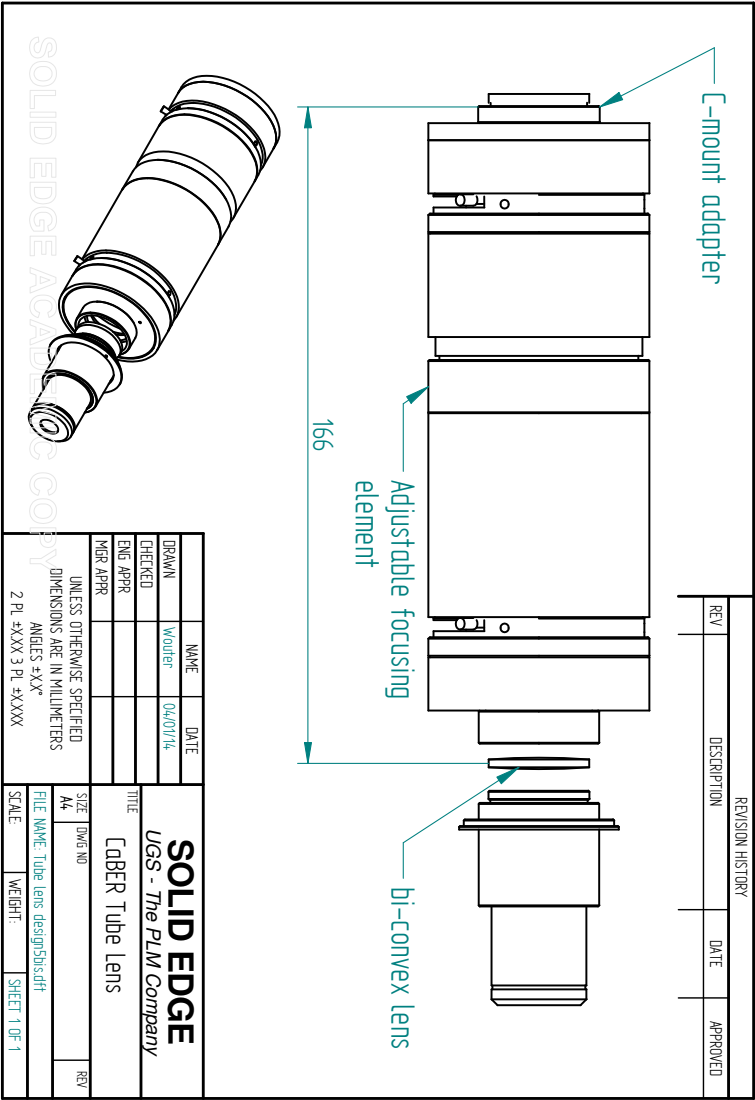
Technical drawing of the tube lens where the zoom lens housing is hidden to show the bi-convex lens. The distance between the C-mount adapter and the lens can be varied with the adjustable focusing element in order to get the required distance of 175 mm between the lens and the camera sensor.
